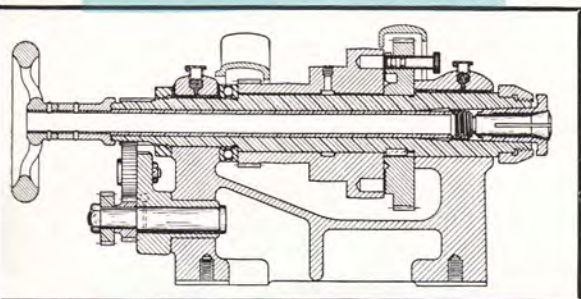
Cross Section of Headstock Showing Collet Chuck Attachment.
